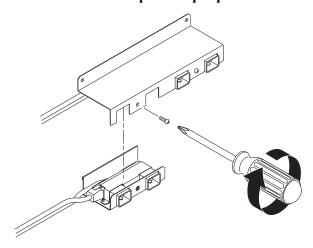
Attaching Connector Clusters to the Power Input Panel
